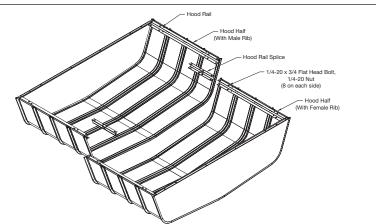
3FKE2 & 3FKE3 Hood Assembly
